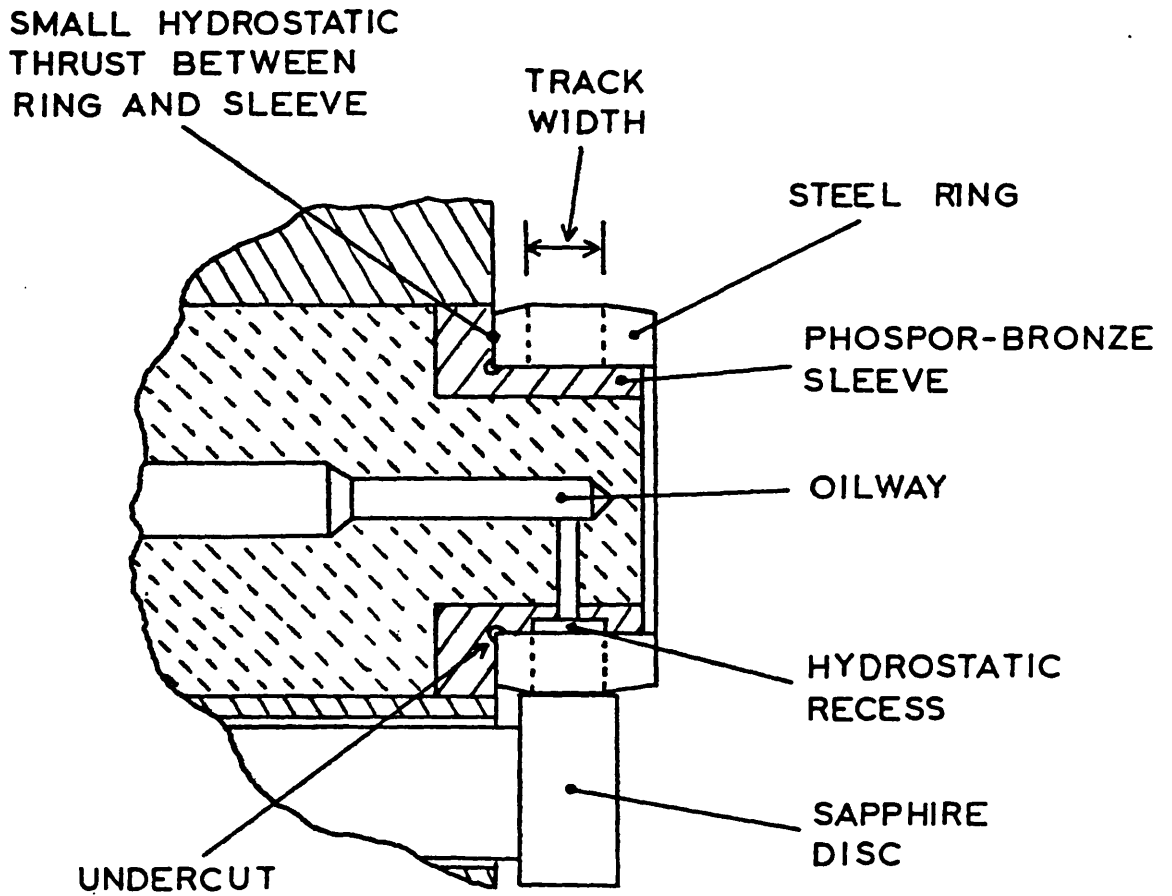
CUTAWAY OF THE HYDROSTATIC BEARINGS
